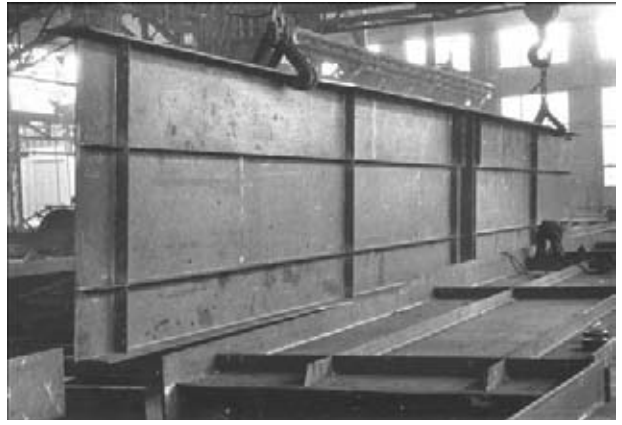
General view of the rig cross-arm for assembly and welding of large-size assembly elements in the workshop of plant of metal structures in Dnepropetrovsk
